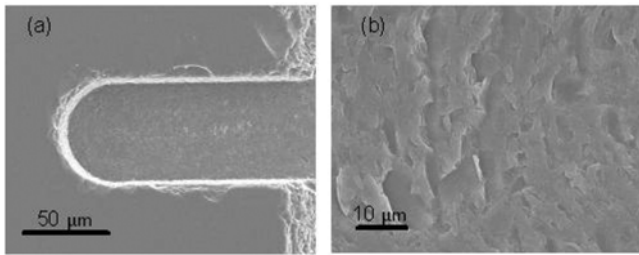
(a) Micro groove machined only by micro grinding and (b) brittle fracture in the groove bottom
